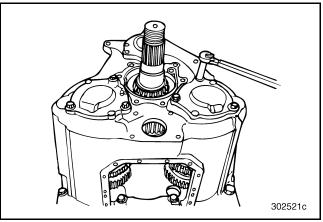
Tightening Rear Countershaft Bearing Cover Capscrews (T313L21/T318L21 Shown)
